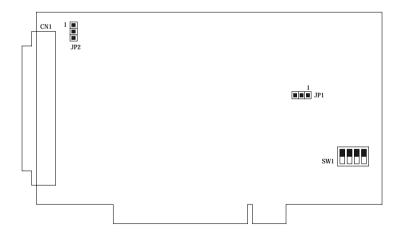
Location of Jumpers and DIP switch on PCI-1756
